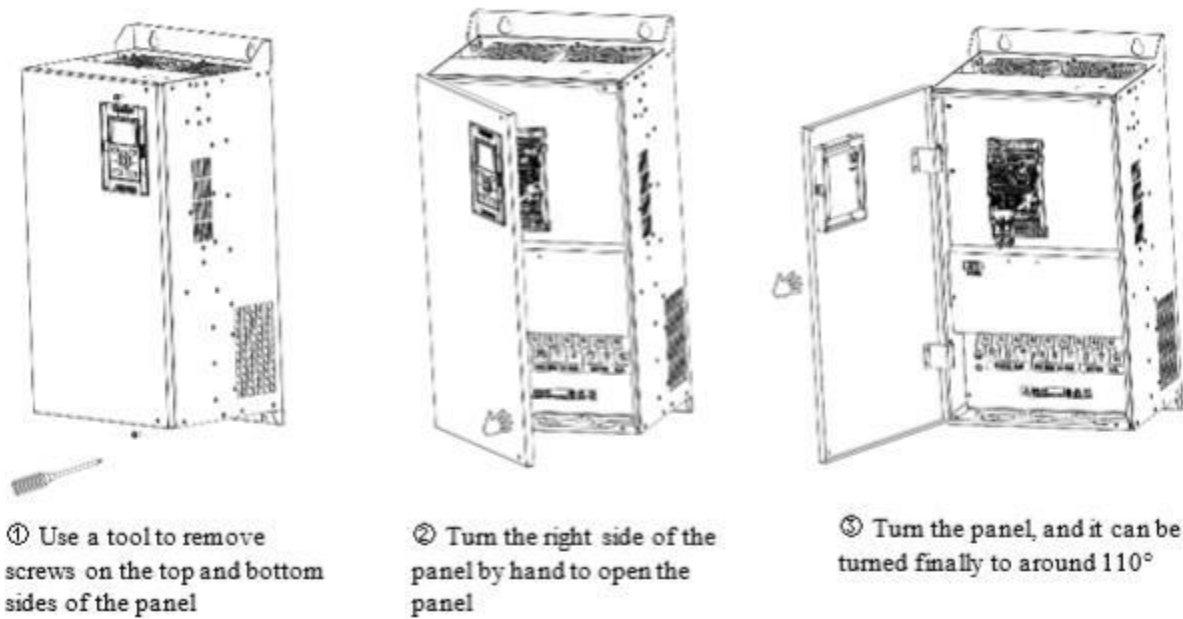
Illustration of 380V 030G/037P~400G/450P and 660V 075G/090P~450G/500P panel removal
